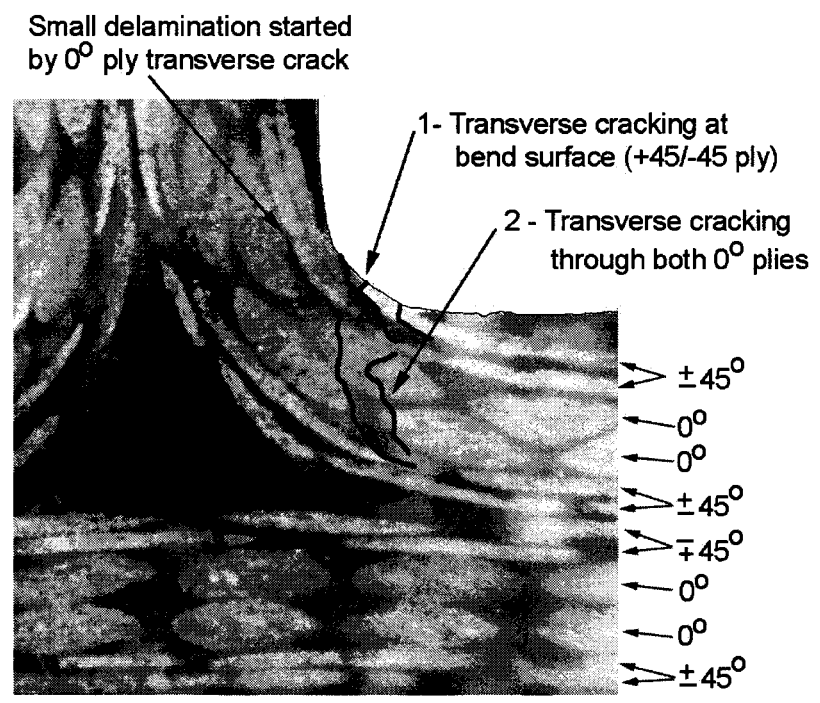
Initial Damage at Web/Flange Fillet Area in Co-Cured Thin-Flanged Stiffener T-Specimens.
